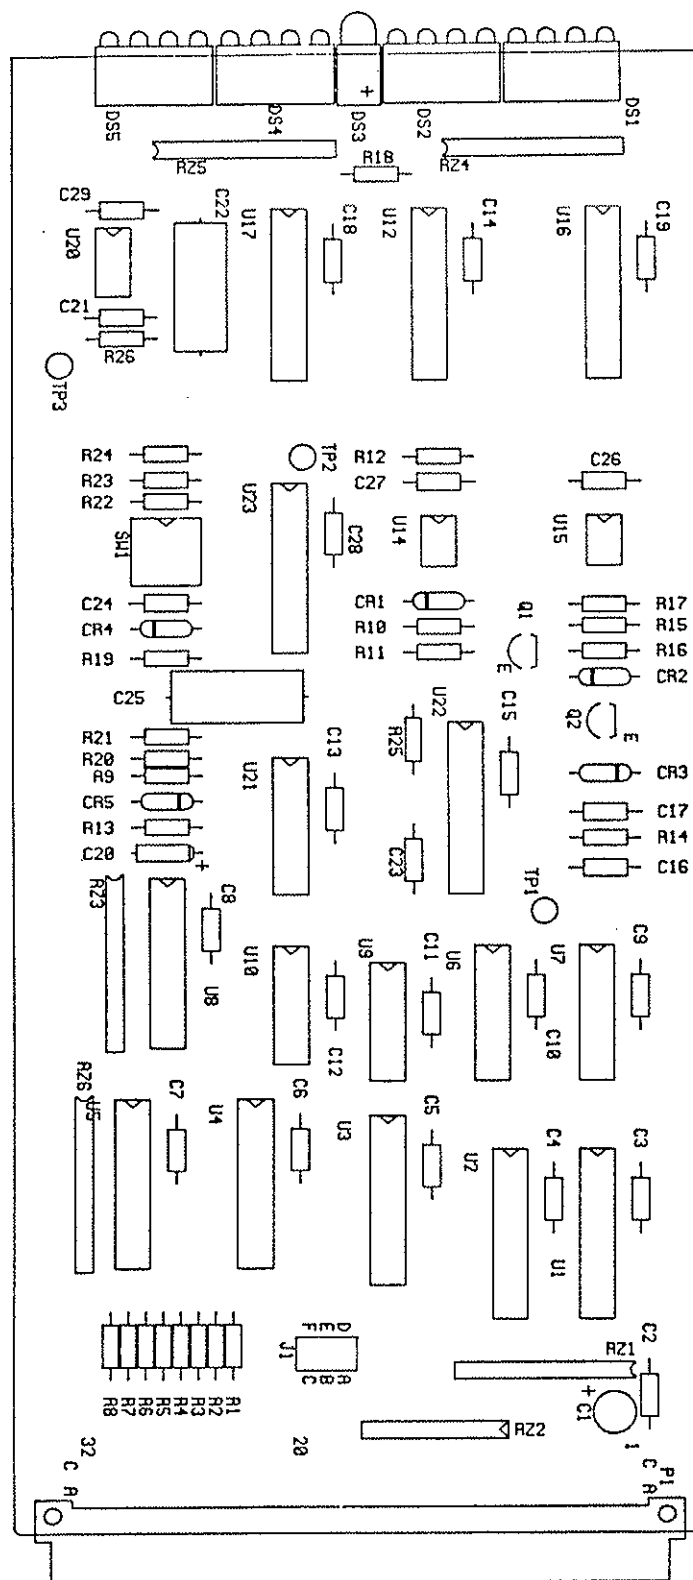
Component locator drawing, RFL 97A IND/OUT Indicator/Output Module
